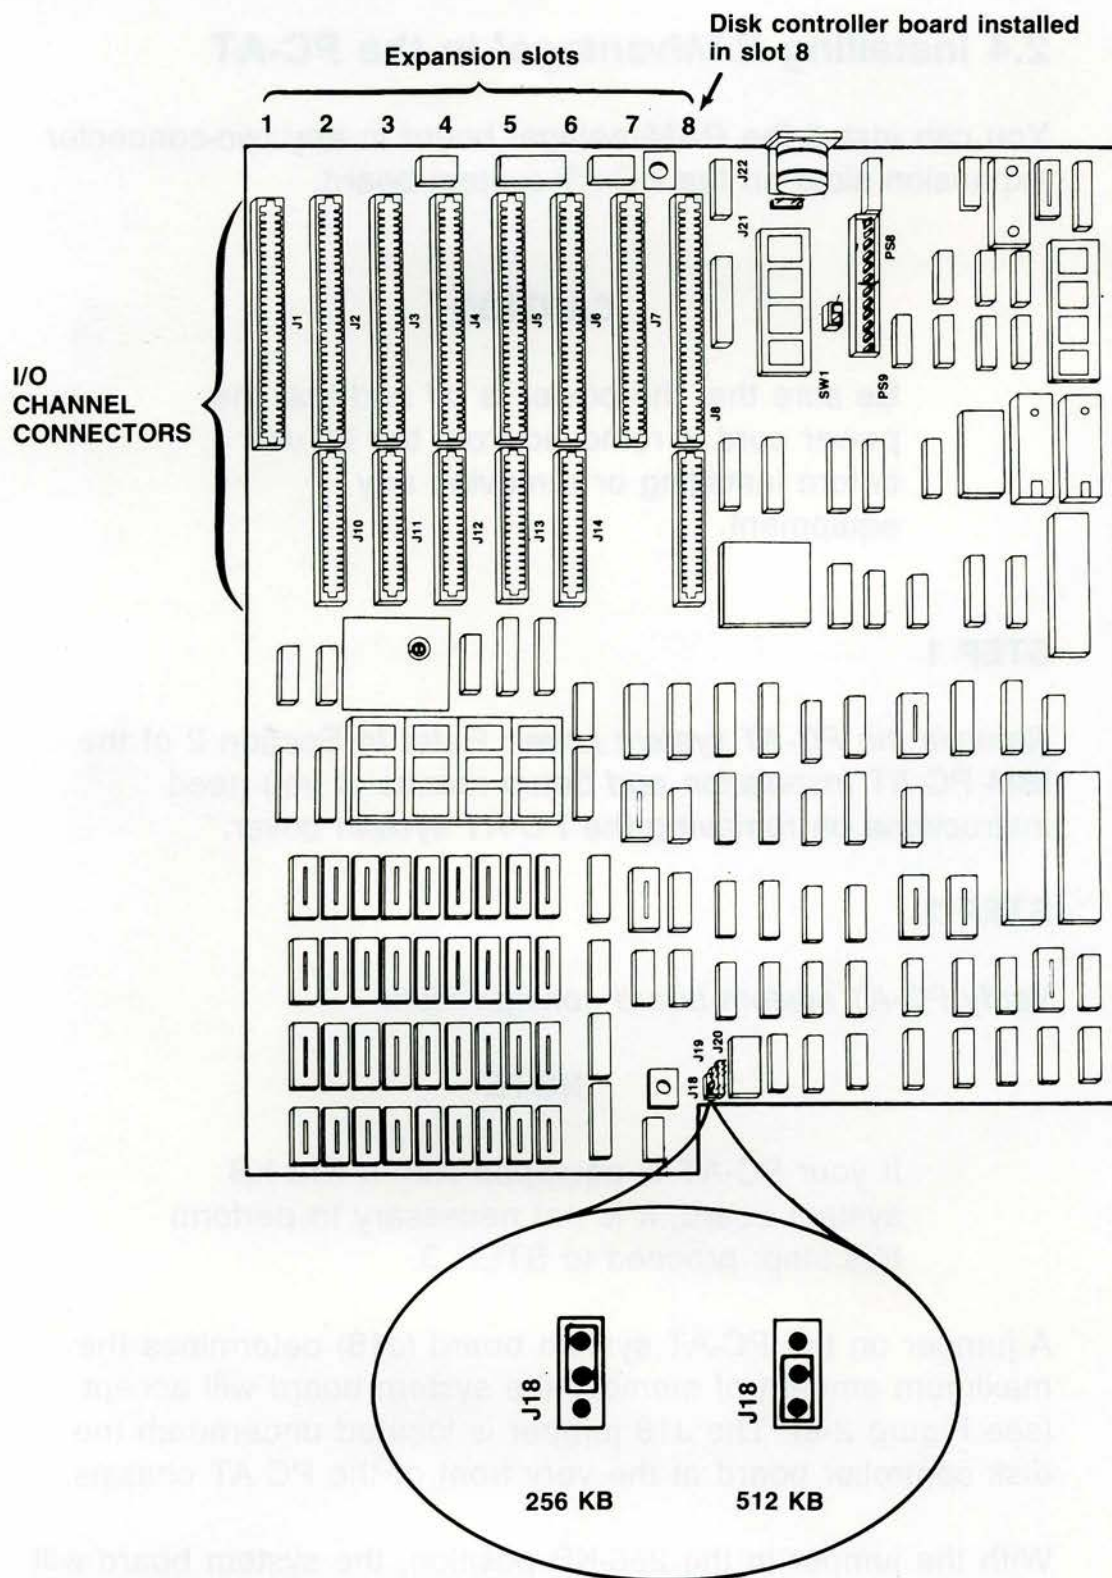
PC-AT System Board Memory Configuration Jumper J18.
